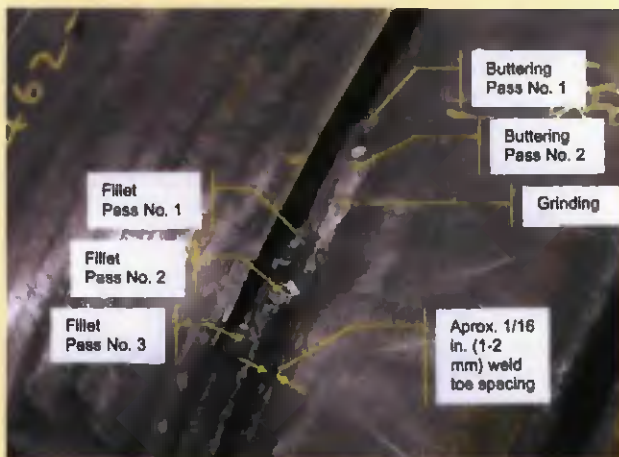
Demonstration weld showing temper bead sequence.
